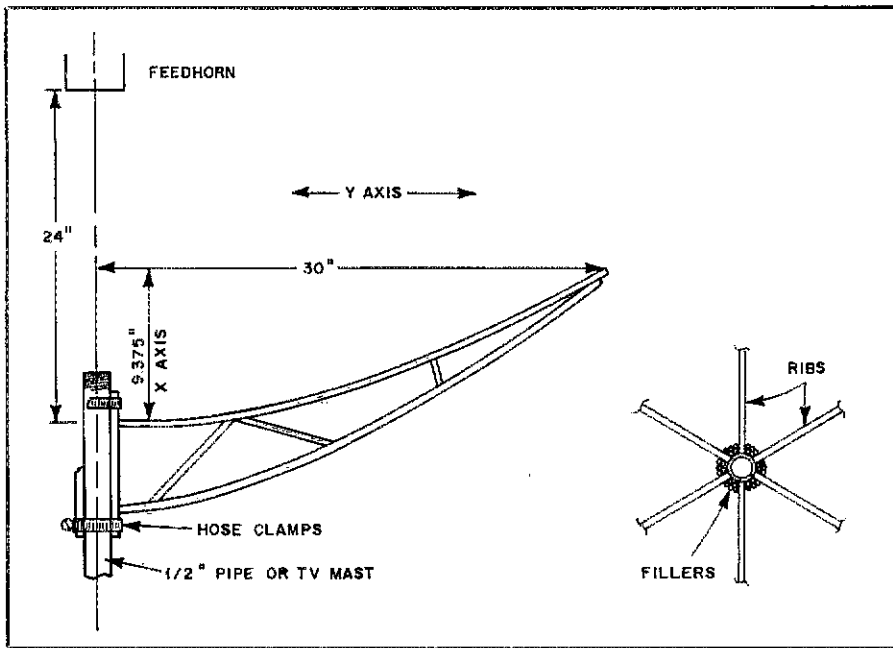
Rib construction details. Dimensions are as specified in Table 2.
